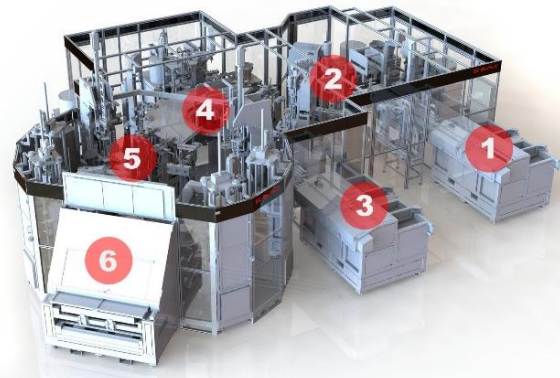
Gas springs assembly line 3D model; 1) piston rod loading; 2) piston rod assembly; 3) coated cylinders loading; 4) gas spring assembly; 5) gas filling and functional testing; 6) unloading station
